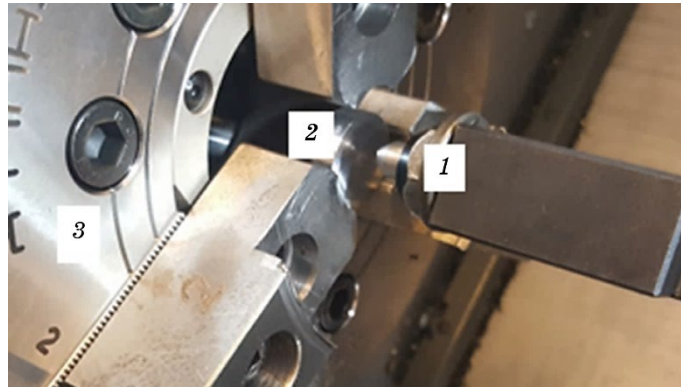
The process of sliding burnishing of the sample surface: 1—DB-3 burnishing tool, 2—sample, 3—three-jaw chuck.
